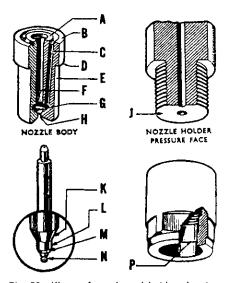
Views of nozzle and holder showing various points for detailed cleaning and inspection.
